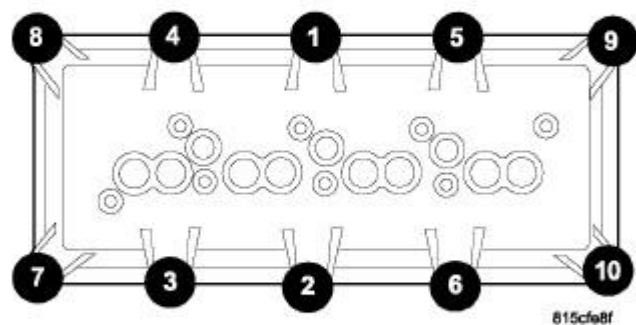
5.7L/6.1L Cover Torque Sequence
